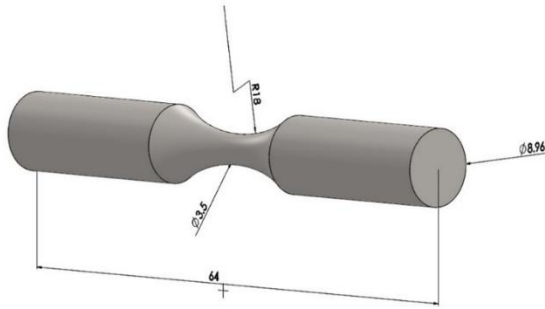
Fatigue specimen according to ASTM E606 (dimensions in mm).
